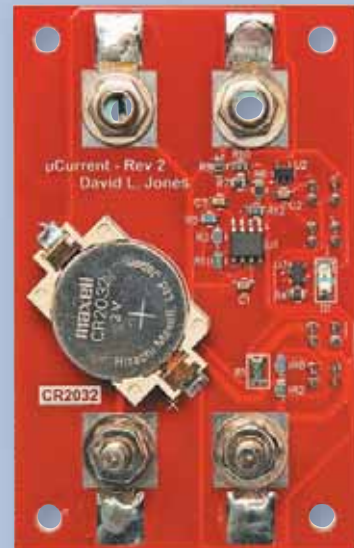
install the parts on the PC board as shown here. You will need a soldering iron with a small chisel-point tip to solder the SMD devices to the board, along with a pair of fine-pointed tweezers and some fine solder.
